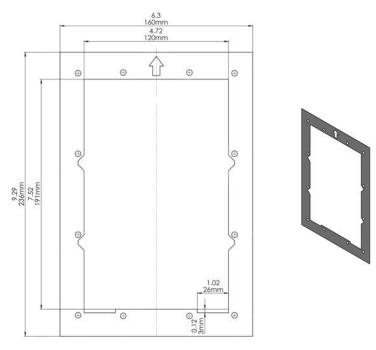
Dimensional drawing, template for tableau cut out (dimensions are in inches/mm)
